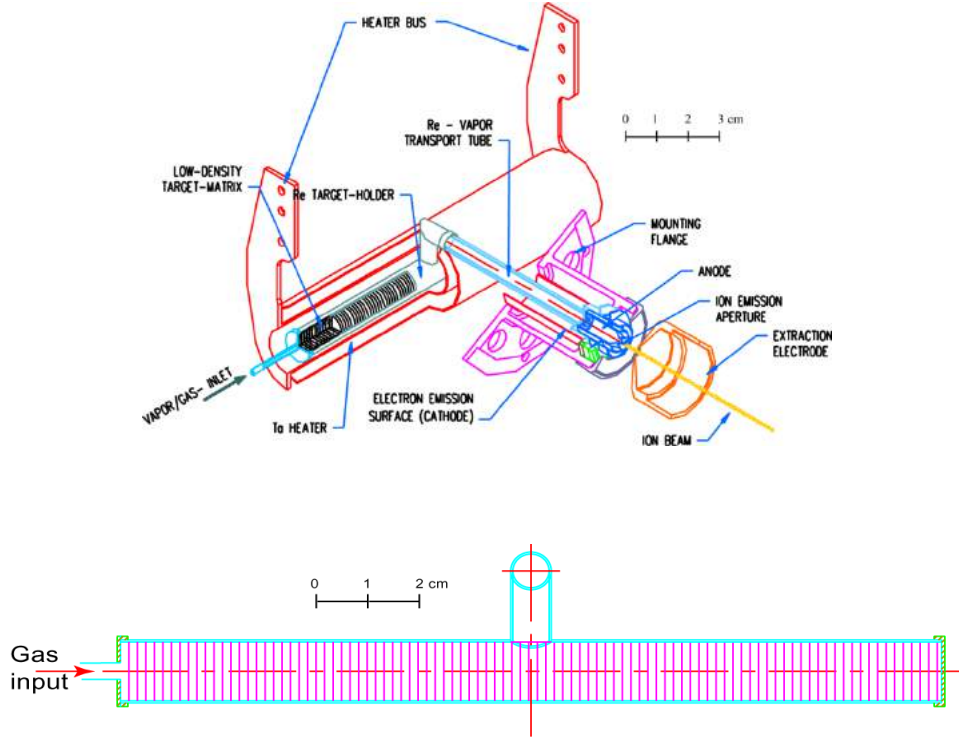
HRIBF serial-coupled target and ion source assembly.
